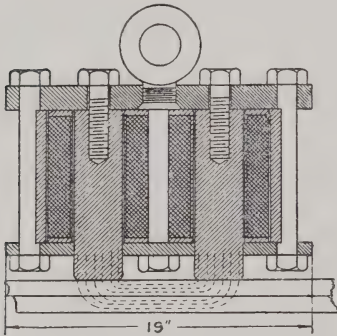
SECTION OF BIPOLAR MAGNET.
